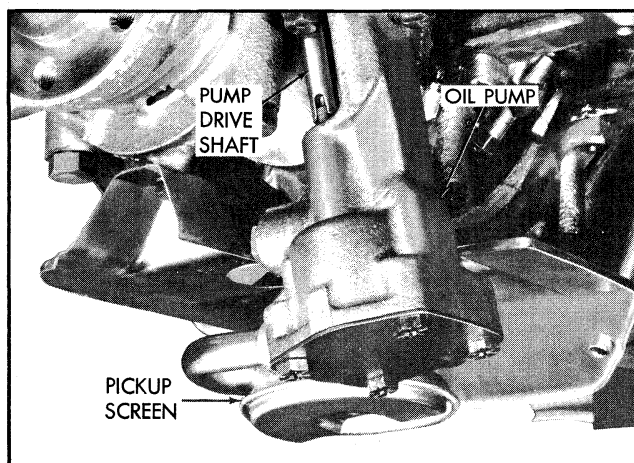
Oil Pump and Oil Pump Drive Shaft
